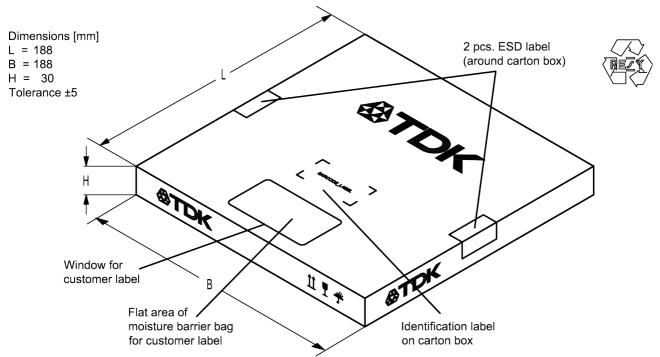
Drawing of folding box for reel with diameter of 180 mm.
